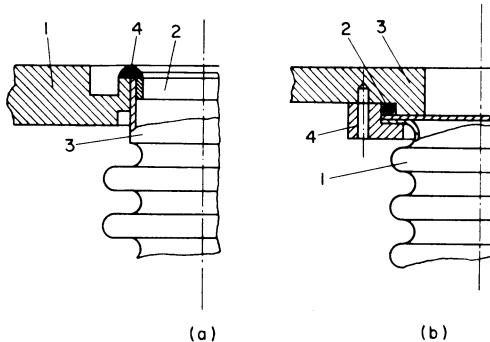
Methods of sealing bellows to flanges: (a) edge welding. After Tasman^{1215a} (*Courtesy of Pergamon Press*); (b) O-ring seal. After Randolph¹⁰²⁵ (*Courtesy of The American Institute of Physics*)
